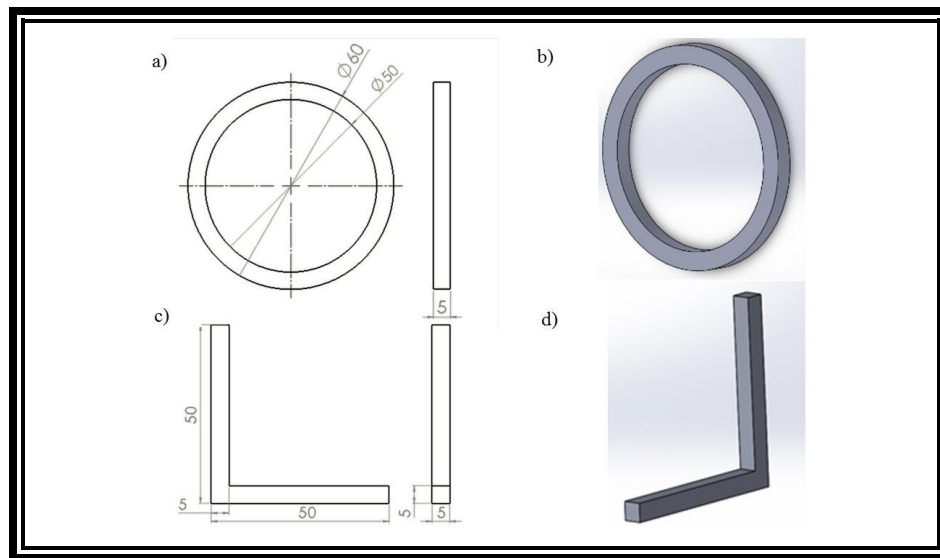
Model dimensions (mm) and CAD models. a-b) Circular shape. C-d) L-shape
